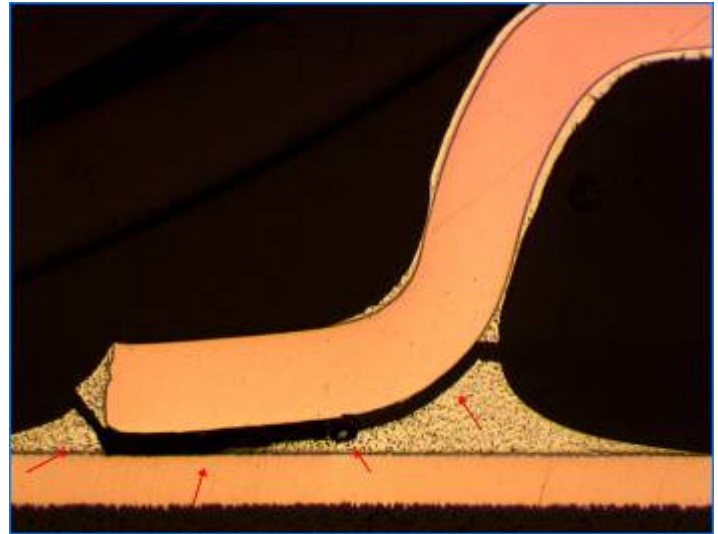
cross section, SN67, U31, left lead solder crack, 100x
